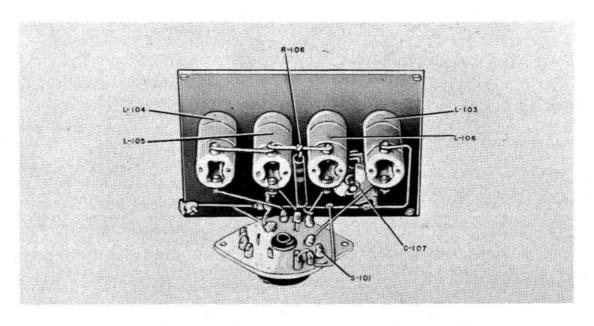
Transmitter Exciter Plate-Tank Assembly - Top View
